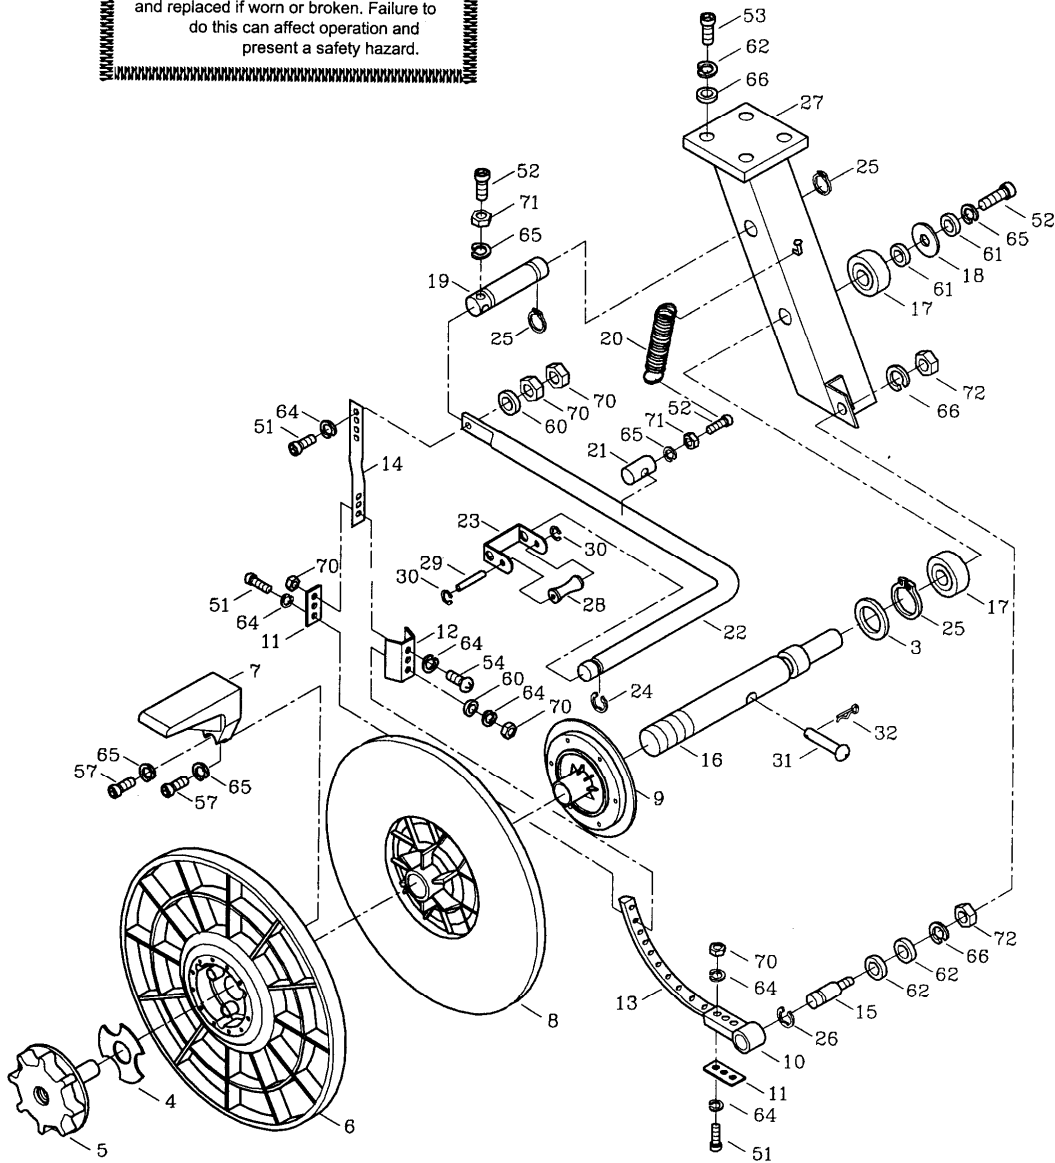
OPEN DISPENSER ASSEMBLY (PLASTIC FLANGE)
